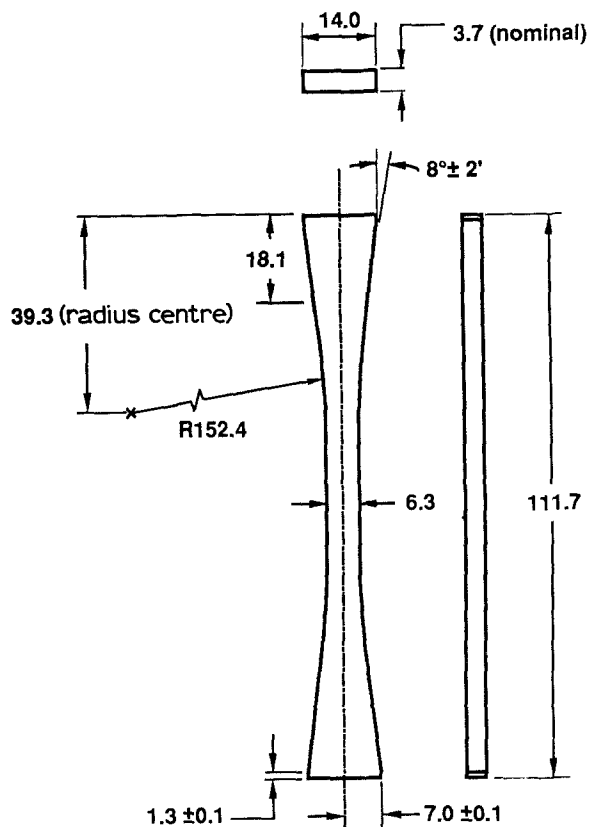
Specimen geometry used to investigate internal heating under tension-tension fatigue loading (all dimensions in mm).
